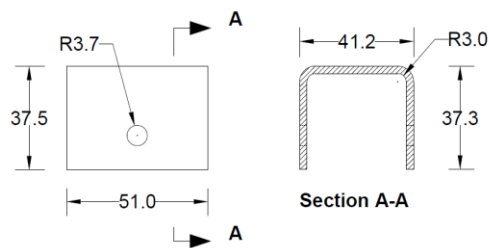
Details of main lock channel (all dimensions are in mm, steel plate gauge 11).
